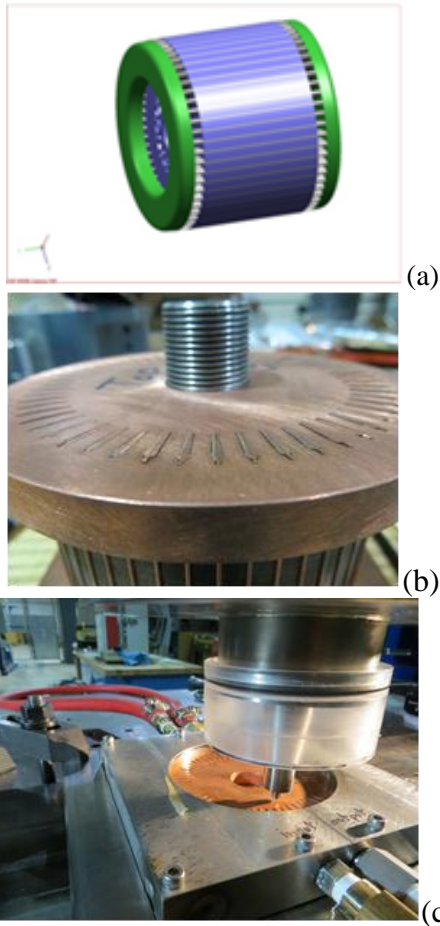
(a) Rotor schematic, (b) Cu end cap positioned on shorting bar ends prior to joining, and (c) FSW tool and rotor in fixture prior to welding.
